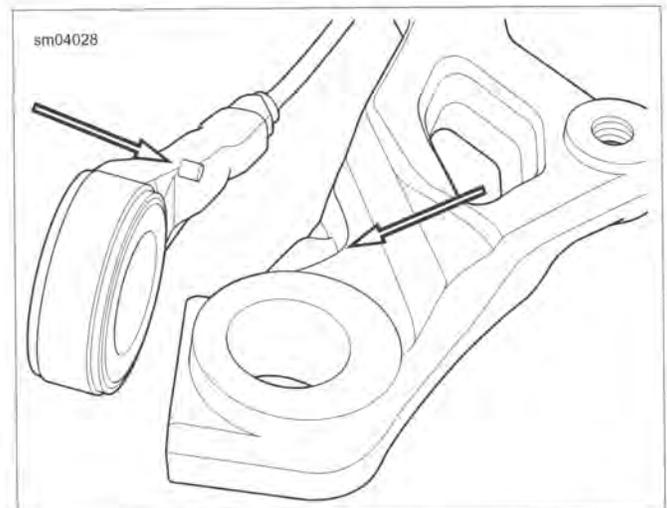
Rear Wheel Speed Sensor Index Pin
